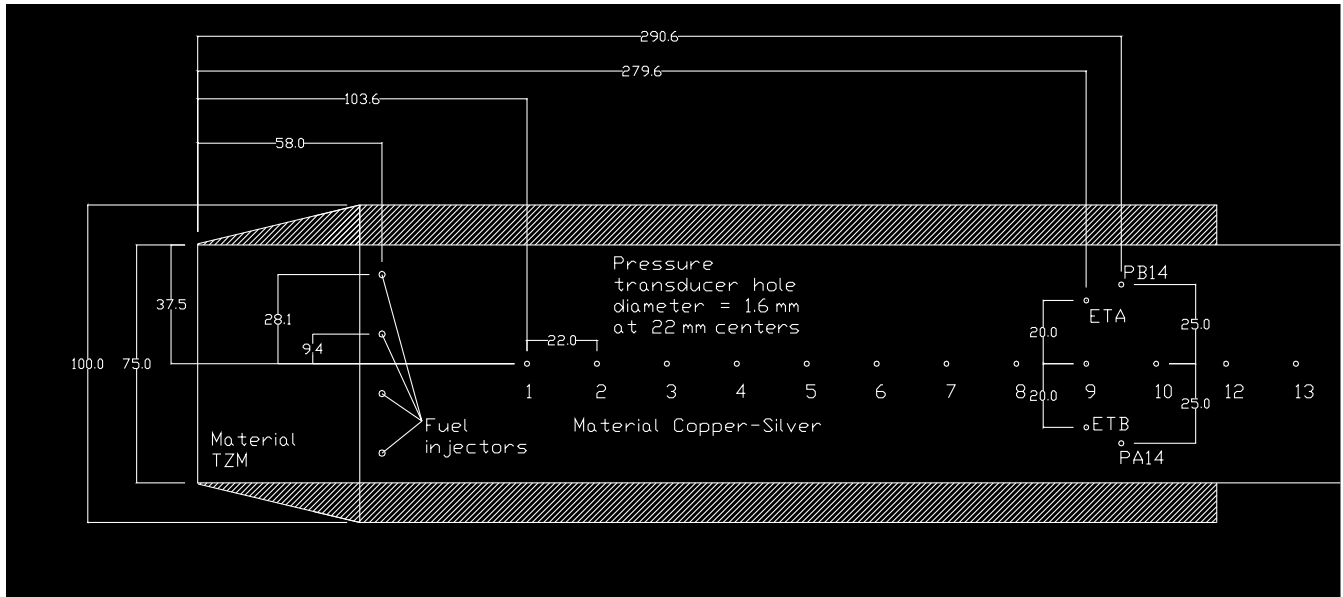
Combustor instrumentation layout and injector location (all measurements in millimeters).
